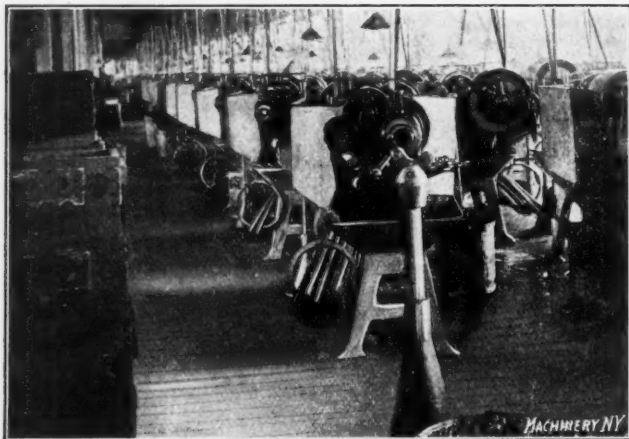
Battery of 340 Automatic Screw Machines, equipped with Splash Guards
